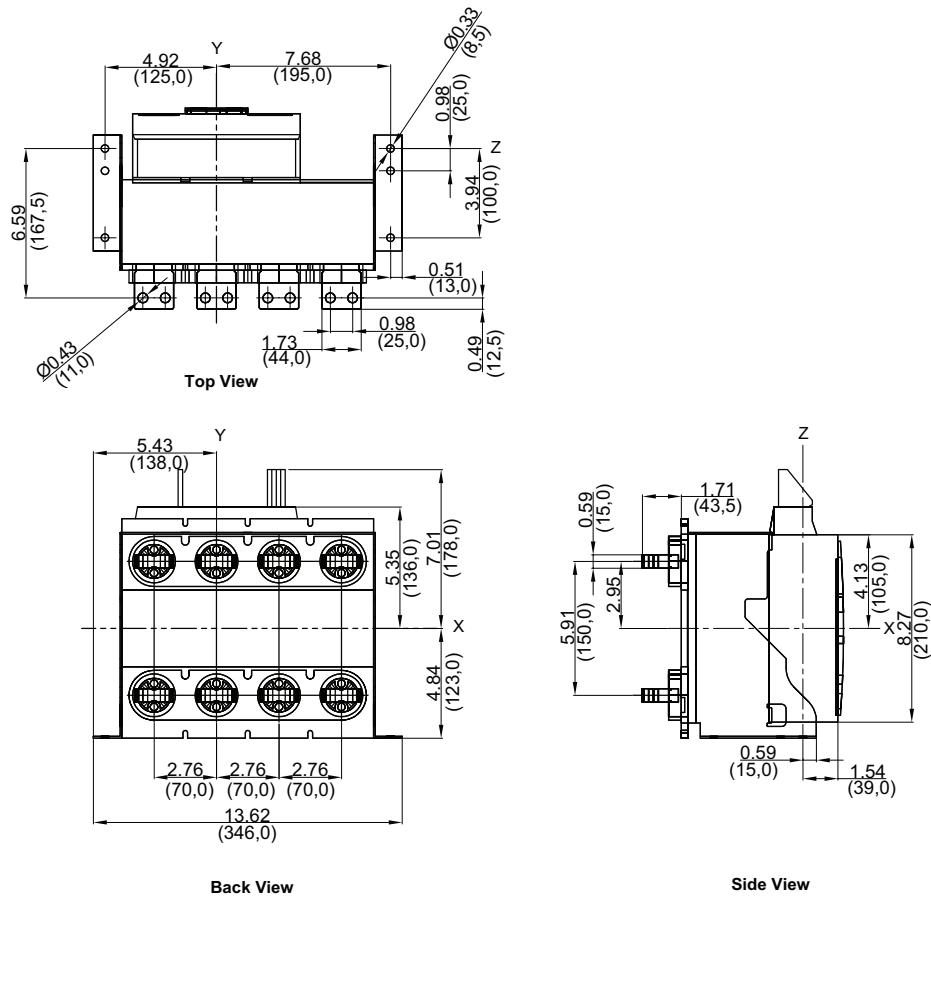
800-1600 A MasterPact NT IEC Four-Pole Fixed—RCTH Rear-Connected “T” HorizontalDimensions: in (mm)
